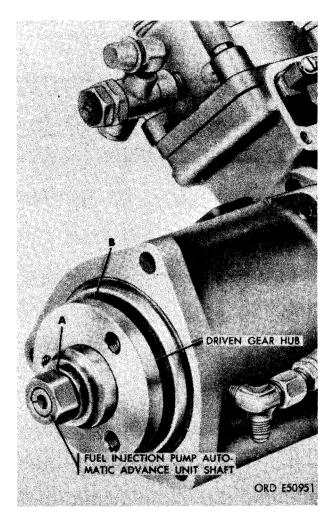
REMOVING OR INSTALLING FUEL INJECTION PUMP DRIVEN GEAR HUB.
